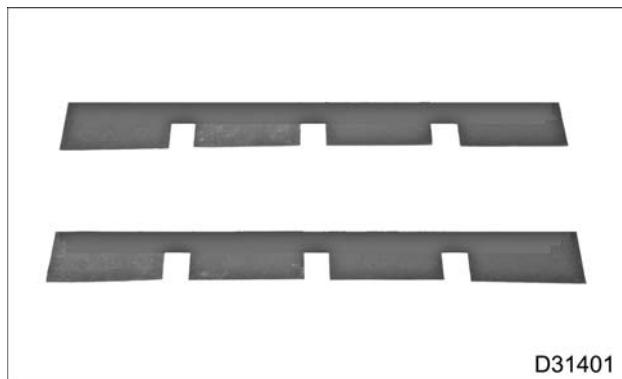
Magnetic Covers for Cylinder Head Intake Ports ZTSE4559
